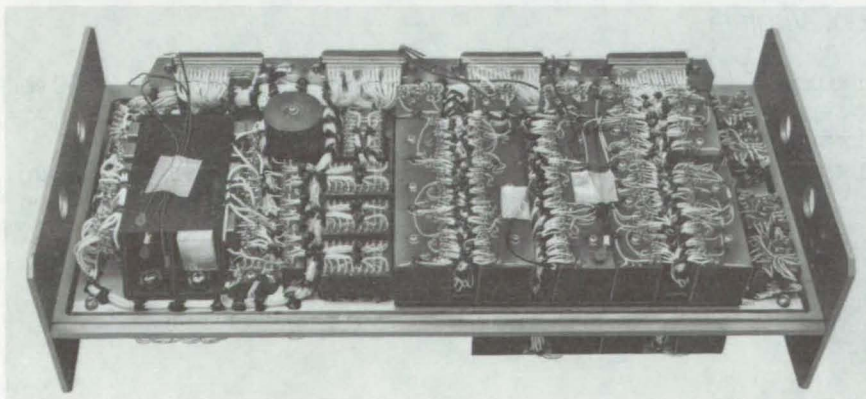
A Support Plate After Installation shows the notched brackets on one side of the plate. The notched brackets are for mounting electrical connectors that fit within the notches.
